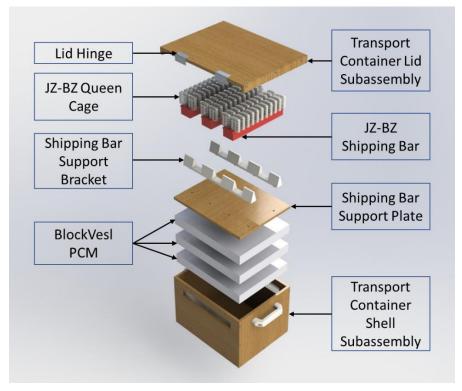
Exploded View of PPC Design (437mm x 284mm x 246mm)
